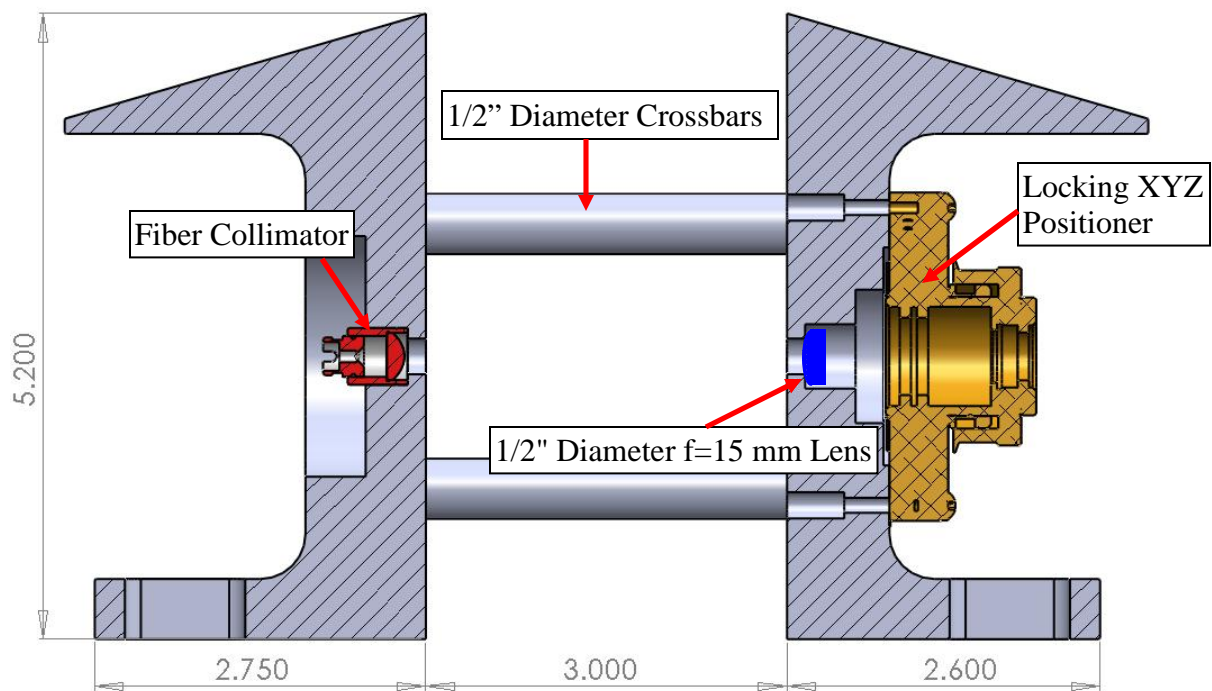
Section view of re-designed absorption gauge with more rigid posts, better shielding for components and better locking optical positioner.
